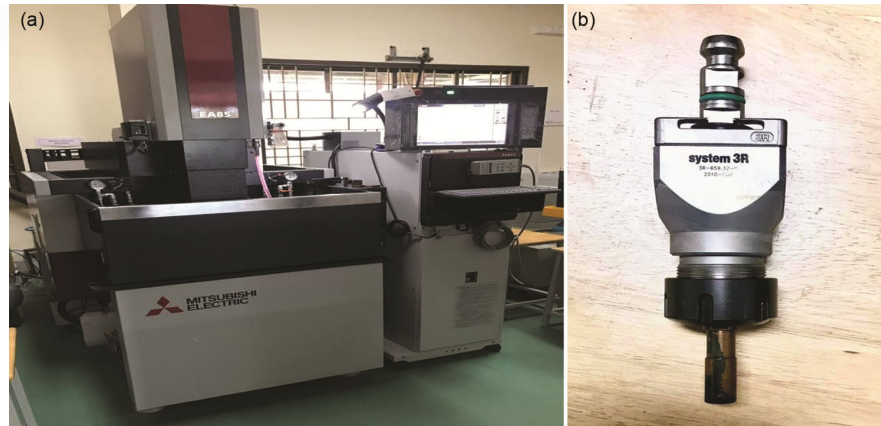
(a) Mitsubishi electric die-sink EDM, and (b) Cutting tool holder with tool.
